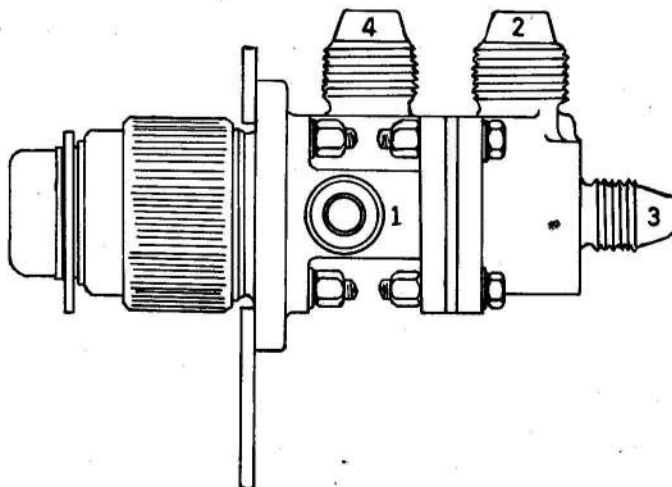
Fill and vent valve (Ref. No. 6D/2166)
